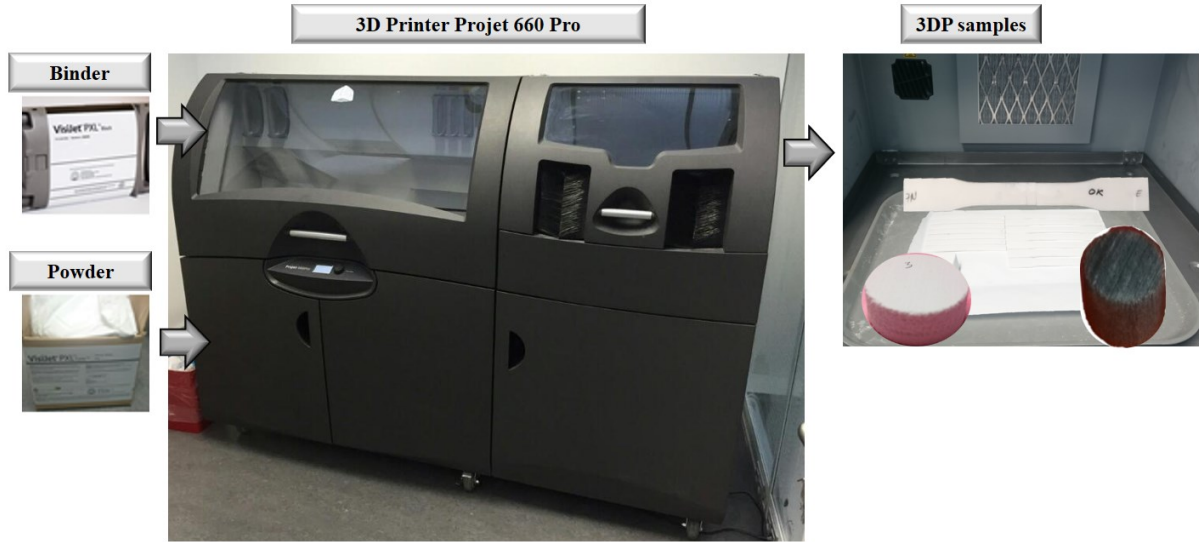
3D printer and printing materials with some printed specimens in the cleaning chamber
